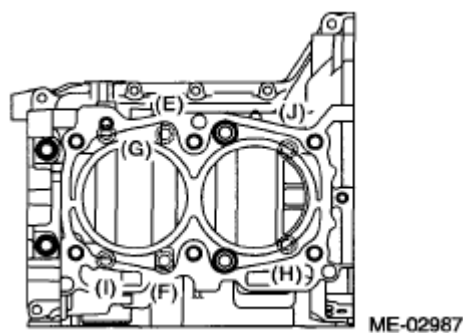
Tightening Sequence Of Cylinder Block Connecting Bolts - RH Side
